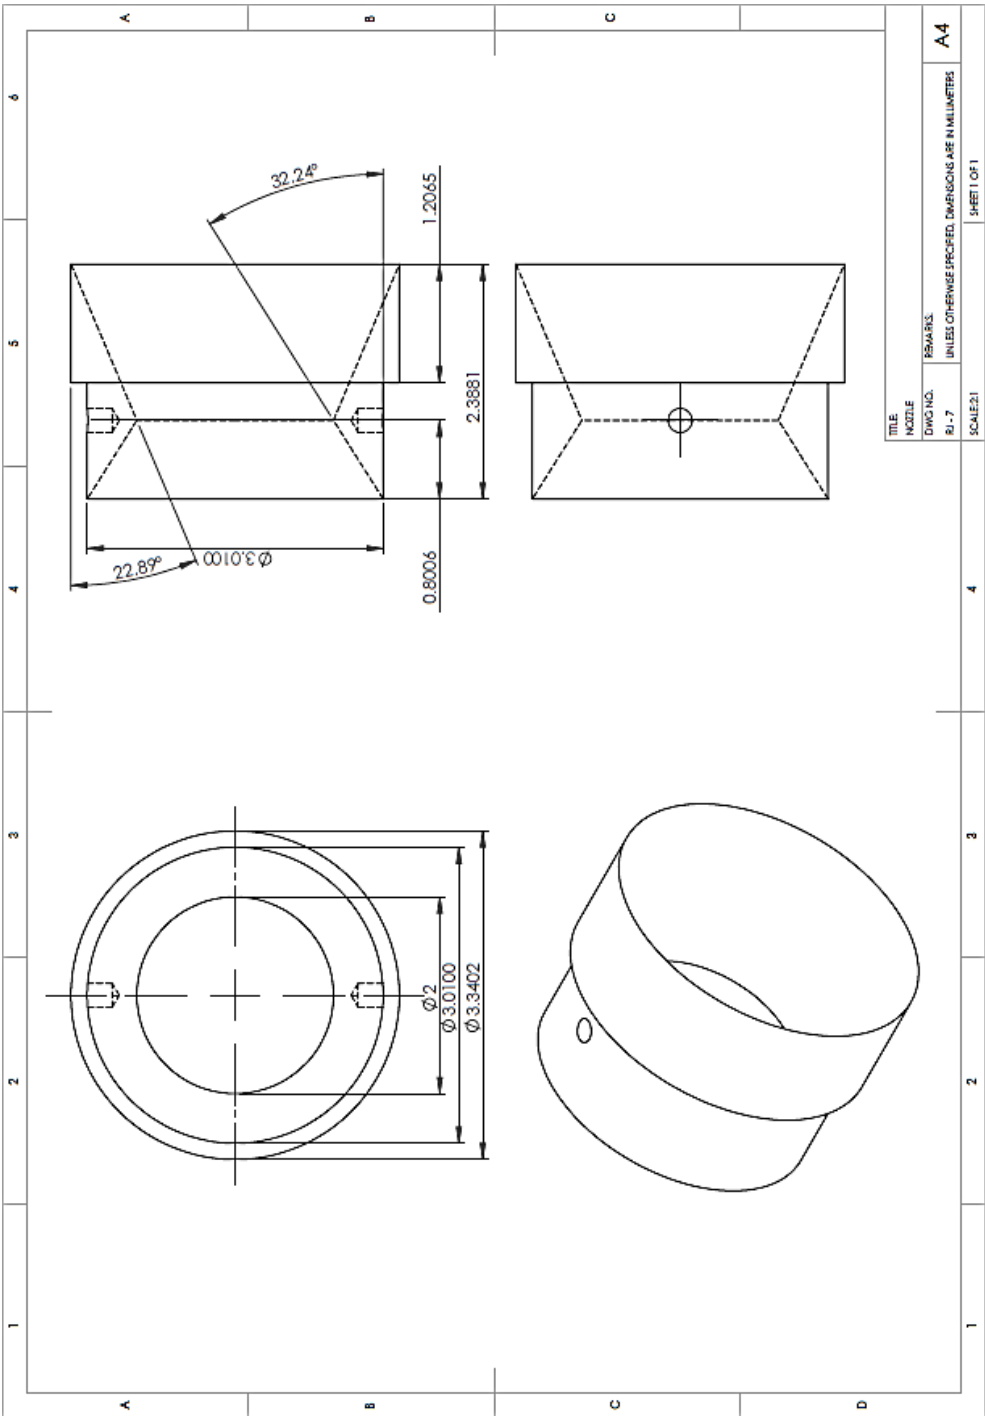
Part drawing: original ramjet nozzle (RJ – 7a). From [3].
